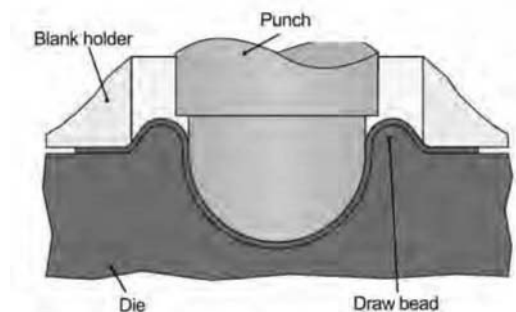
Draw bead located inside the die. Source: Ref 2.4
